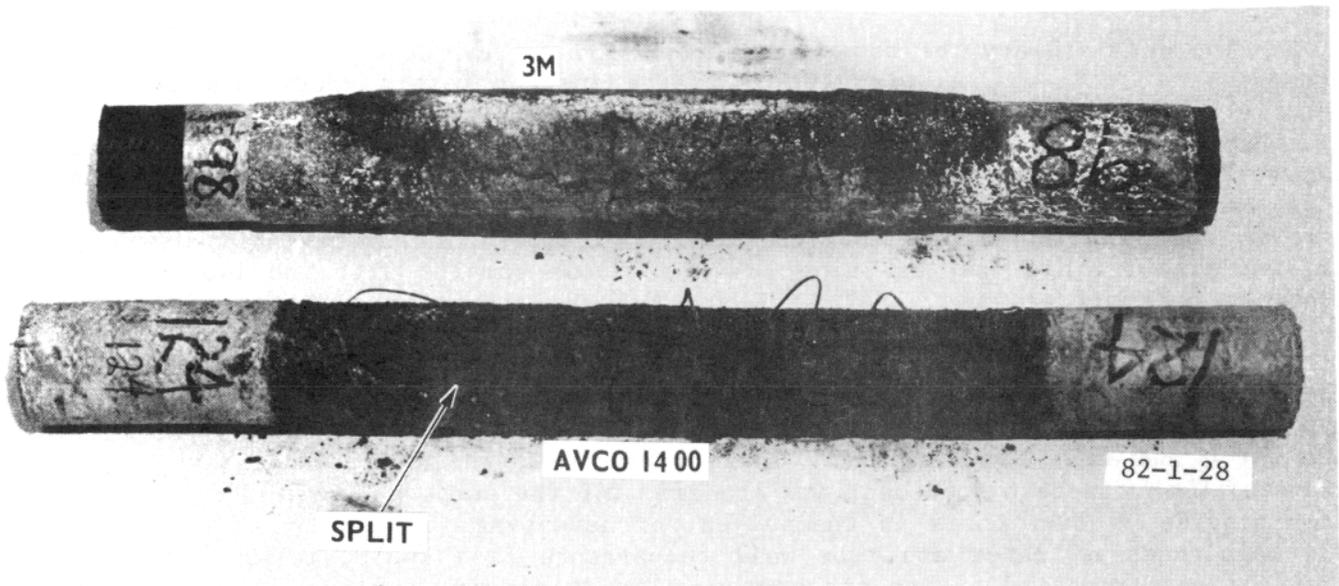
TYPICAL COATED AEROQUIP SELF-SEALING FUEL LINES AFTER TEST IN DRY BAY FIXTURE
